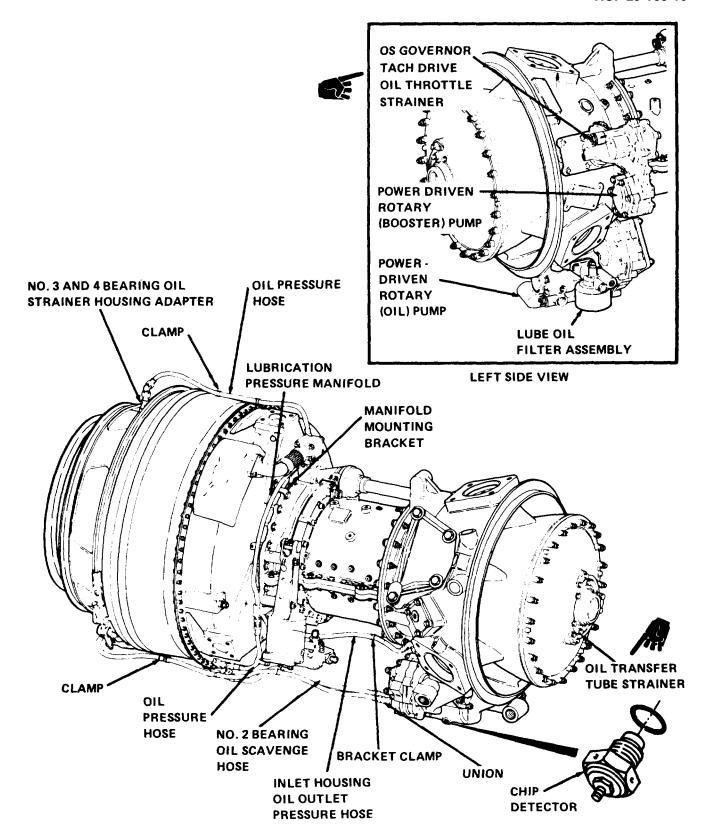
Lubrication System External Components (T53-L-11 Series Engines)
